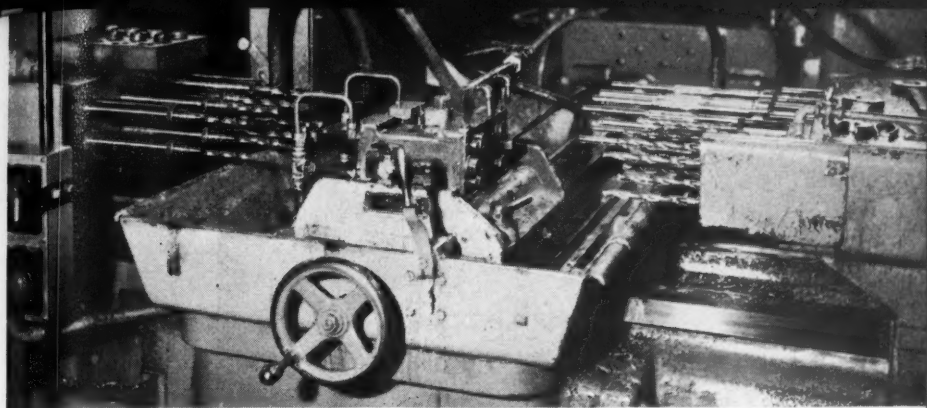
The bolt holes in the master connecting rod are drilled and reamed in this Foote-Burt Horizontal Multiple Drill. The drilling is done from both ends of the machine.
